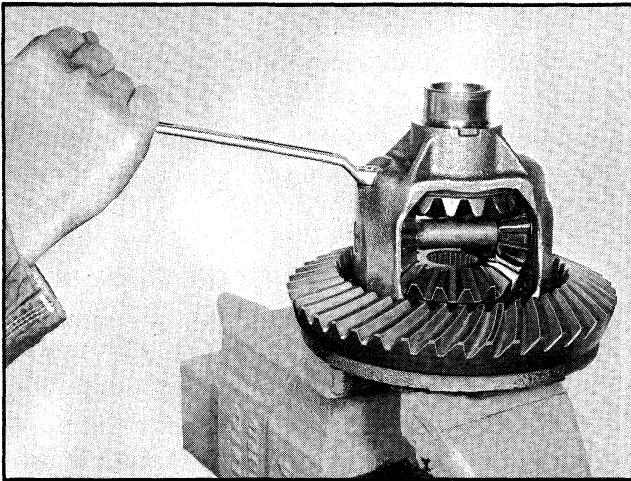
Installing Pinion Shaft Locking Bolt
